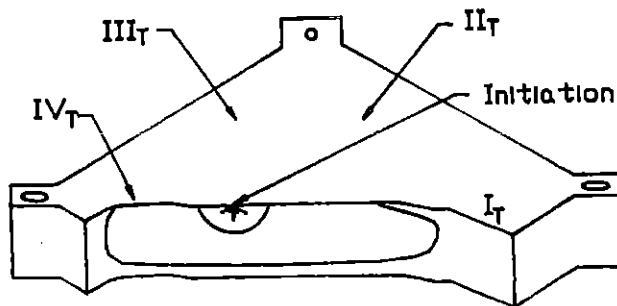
Fracture surface with initiation site, specimen 3x1.5 in (7.6x3.8 cm)
